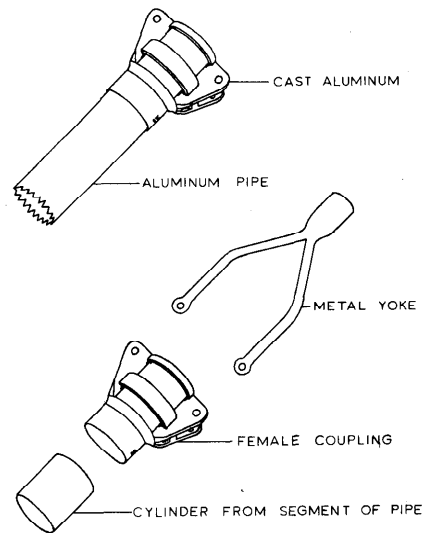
Sketch showing construction of sampling apparatus and cores from aluminum irrigation pipes.
